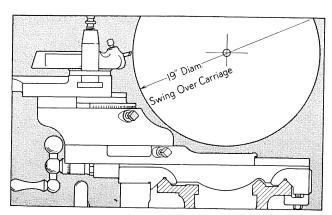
Fig. S. Offset Raising Block for Tool Rest provides increased swing over the lathe carriage.
